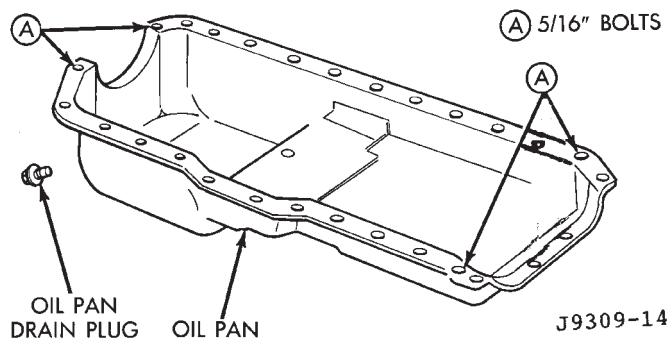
Position of 5/16 inch Oil Pan Bolts
